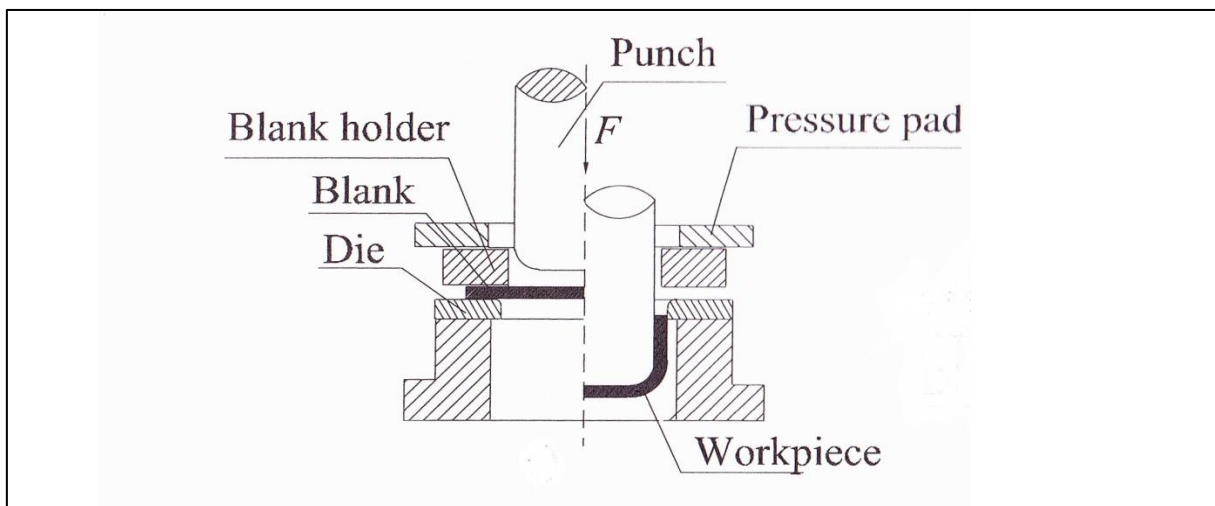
Deep Drawing Process: Pure Drawing⁸⁴
